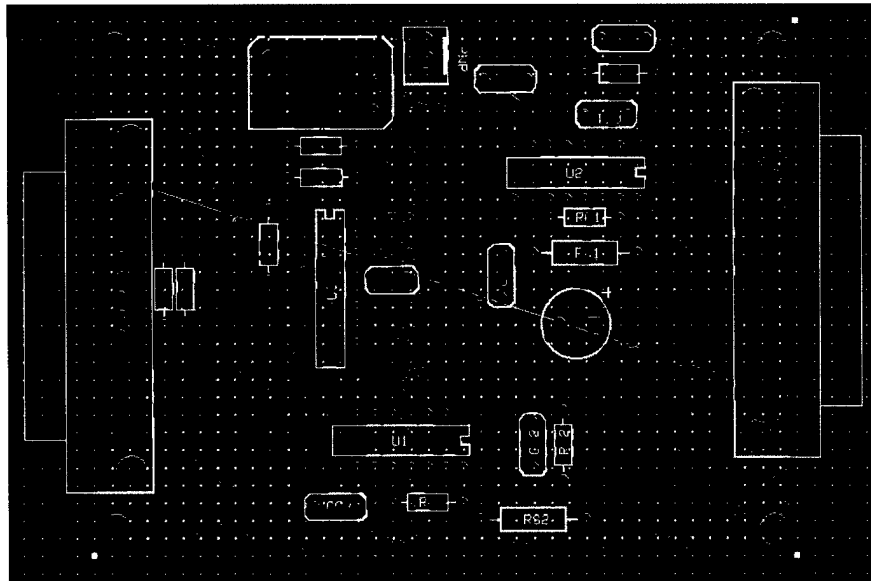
Stepper Motor Controller Printed Circuit Board
